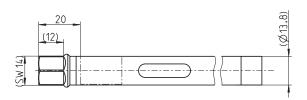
Mounting wrench ø13,8/SW14 Type 1300A67 for mounting bore ø14 mm
